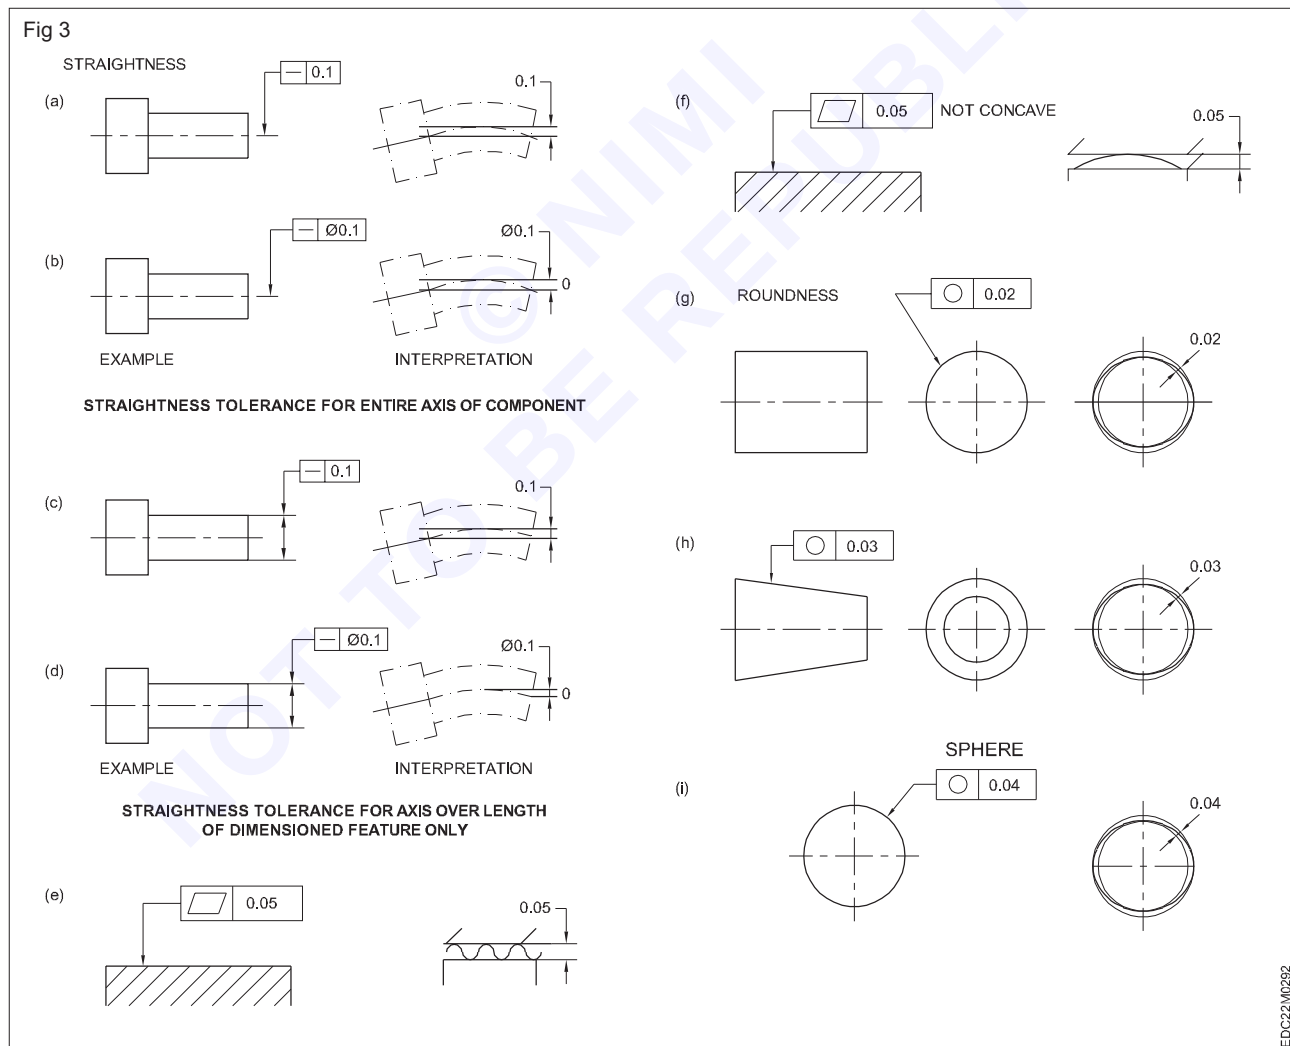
& (3d) show the same geometrical tolerance, applied this time to the diameter dimension of the smaller diameter of the part.
